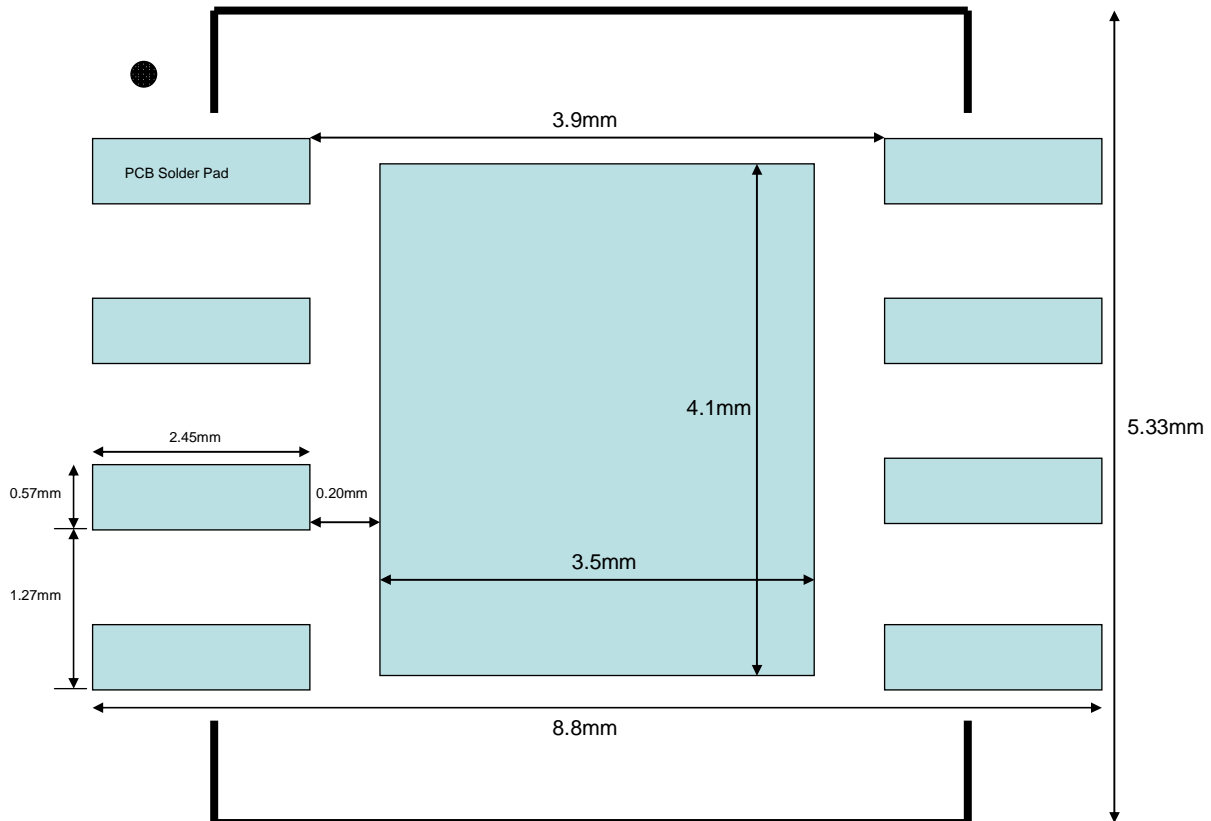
Dual Layout PCB Footprint for the 209mil 8-SOP and 6x5mm 8-WSON Packages.
